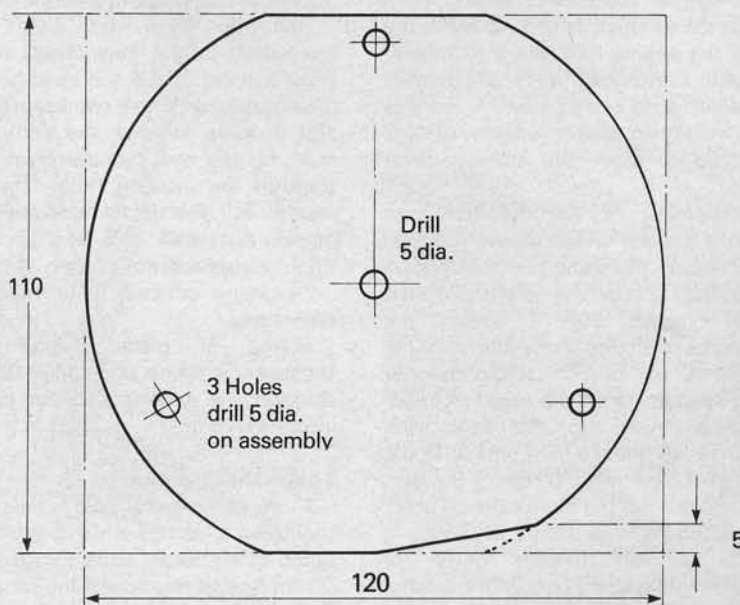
Reversing disc for 3-cylinder engine B.M.S. sheet
